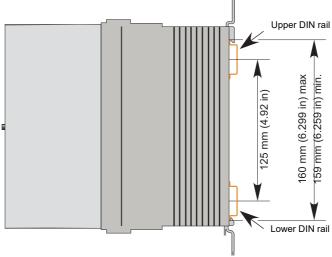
DIN rail mounting details for 80A, 100A and 125A units
